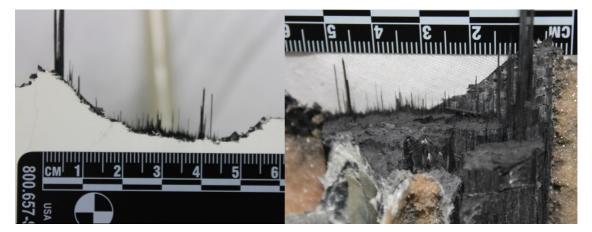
Lower spar cap from the left wing showing characteristics of flexural failure. Note the tensile fracture surface (Source: Author)
